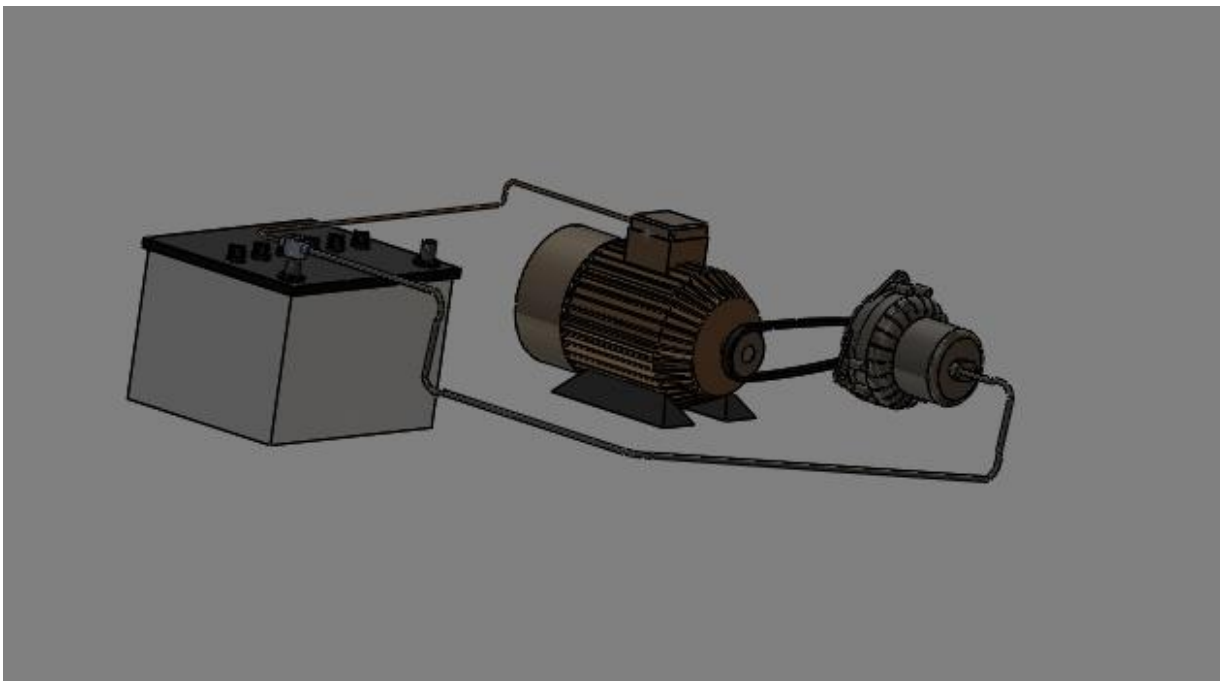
Assembled parts of portable fast battery charger by using solidwork
